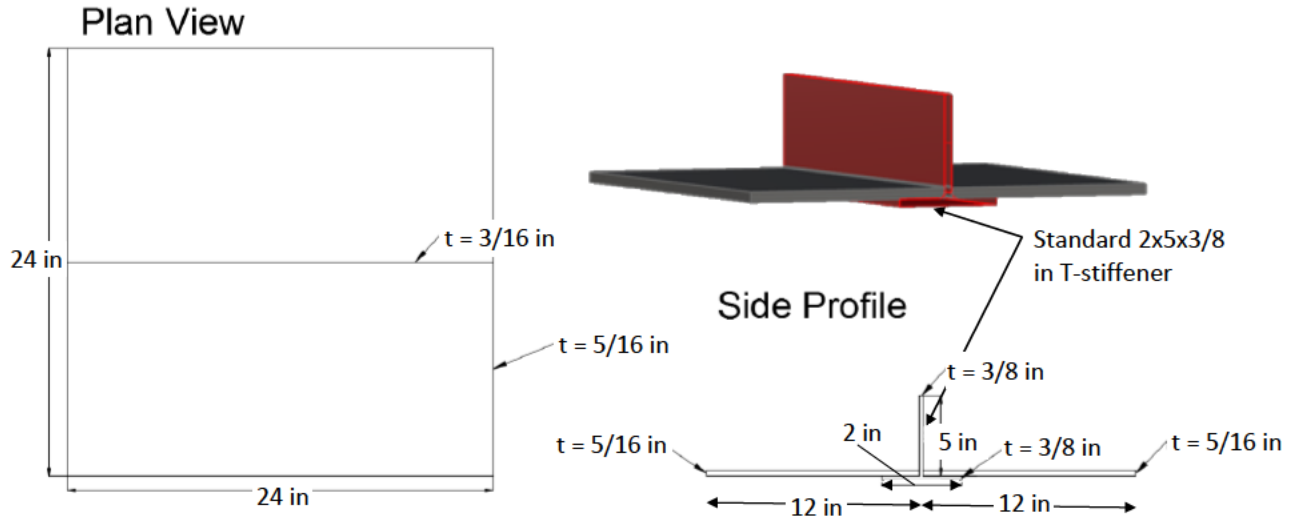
Offset Load-Carrying Fillet Weld Connections Fillet welds were made where the plate intersects the T-stiffener web on the top and where the plate and flange overlap on the bottom
